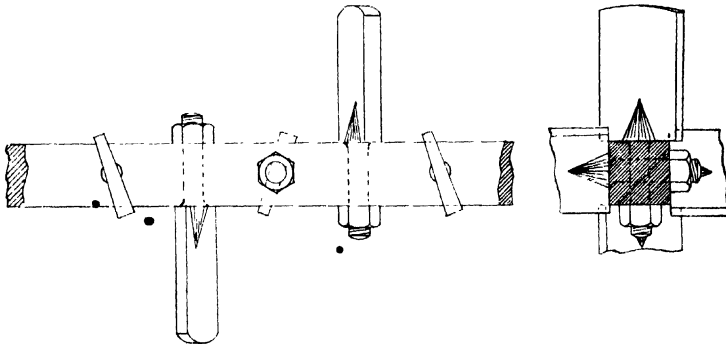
Paddle-blade Conveyor (Wedge Cutters).
